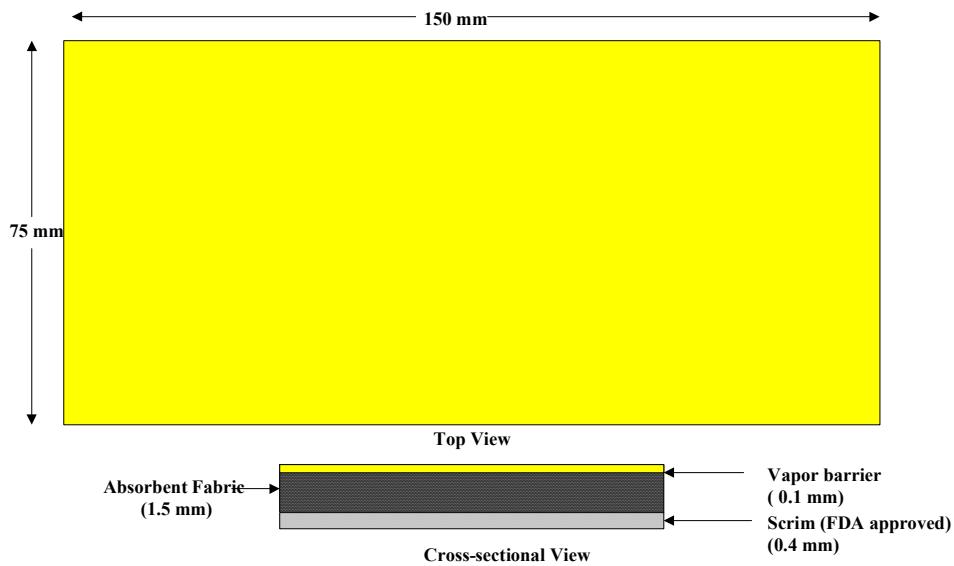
Structure of Proposed CWA Decontamination Wiper Pad.
